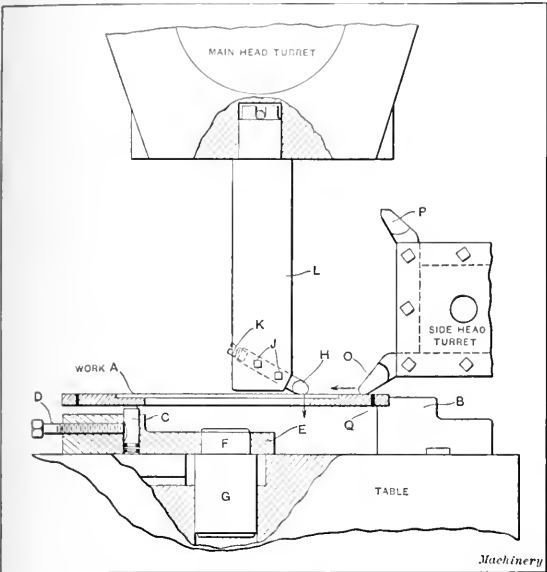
Machining Steel Sprocket for Automobile Trucks
